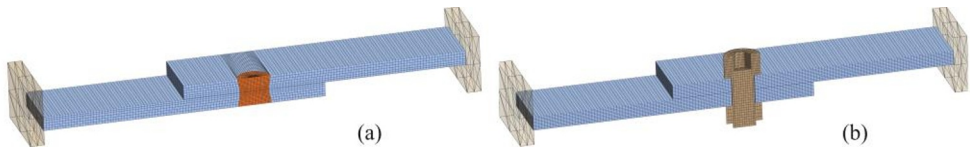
Three-dimensional finite element models of the (a) double-flush riveted and (b) bolted joints.
